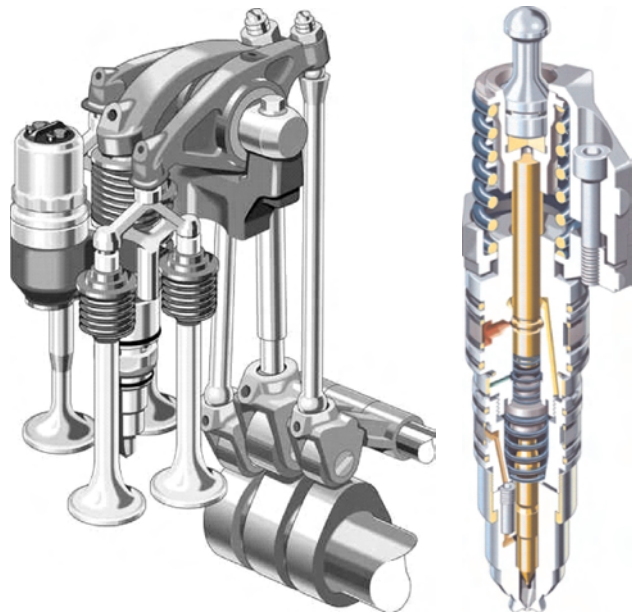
Valve and pump nozzle drive in DSC16 V8
